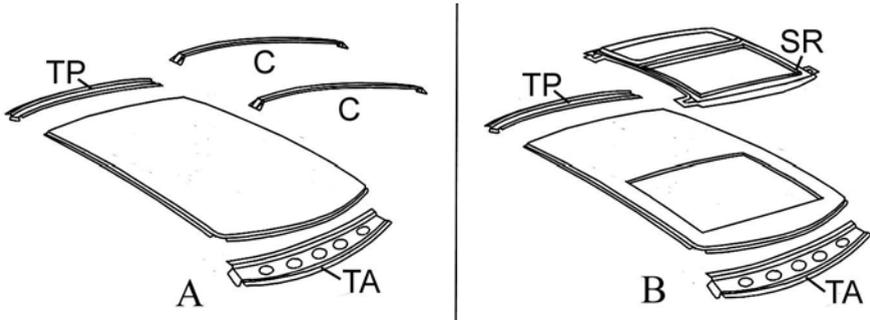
Typical set of roof assembly parts for a metal closed roof (A) and in case of partly sliding top (B). TA: front roof cross member; TP: rear cross member; C: bows; SR: brace for roof top opening.
